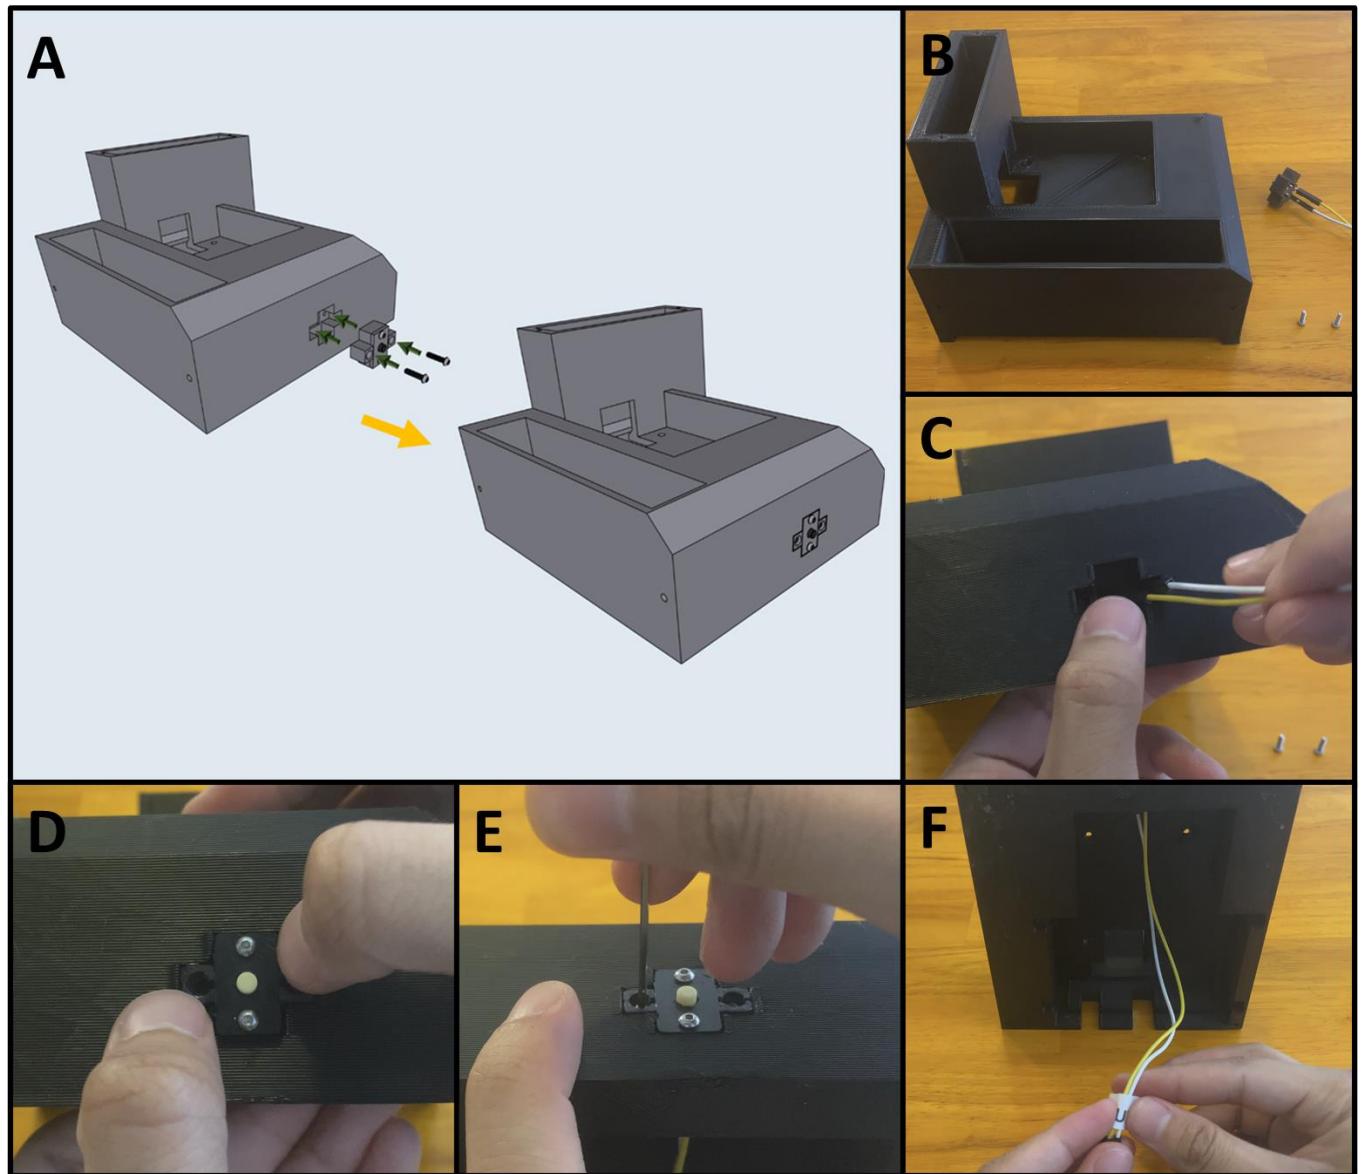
f: The procedure for attaching the Purge Button Assembly to the base.
